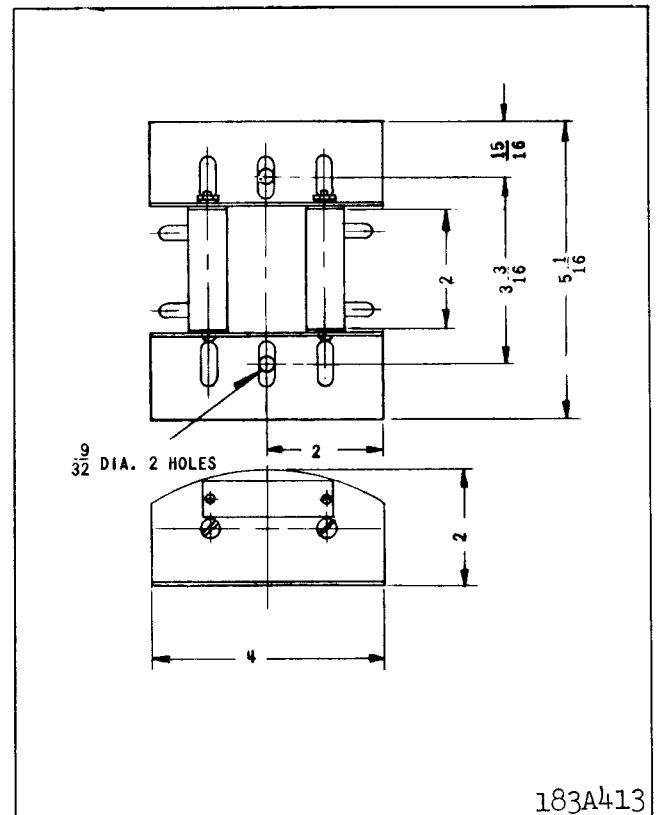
Outline & Drilling Plan for External Remote Trip Resistor Assembly.
